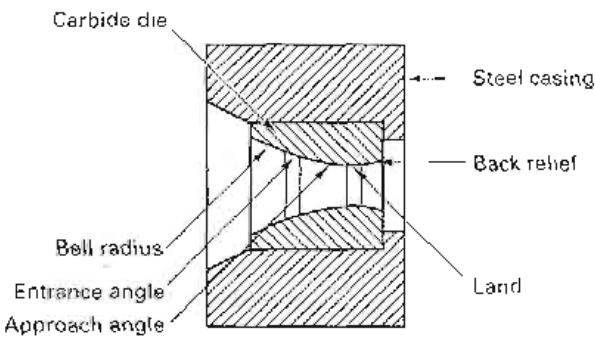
Cross section through a typical carbide wire-drawing die showing the characteristic regions of the contour.
